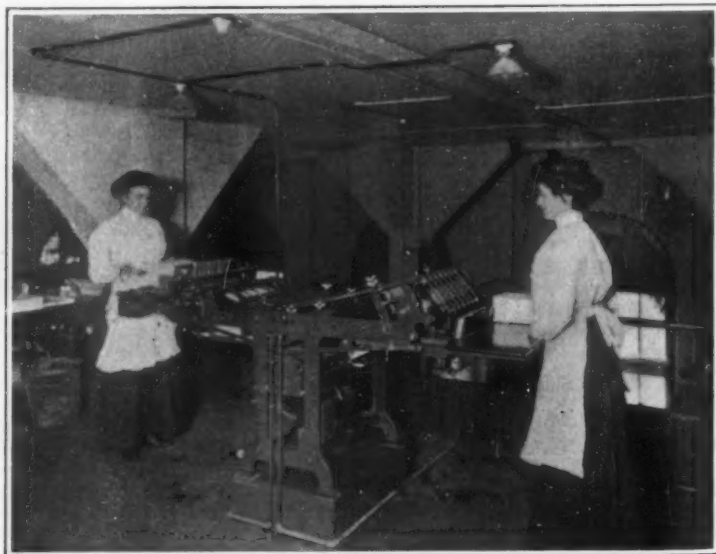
How the paper passes from the feeder of the dampening machine down into the water and how it is automatically stacked on edge.
